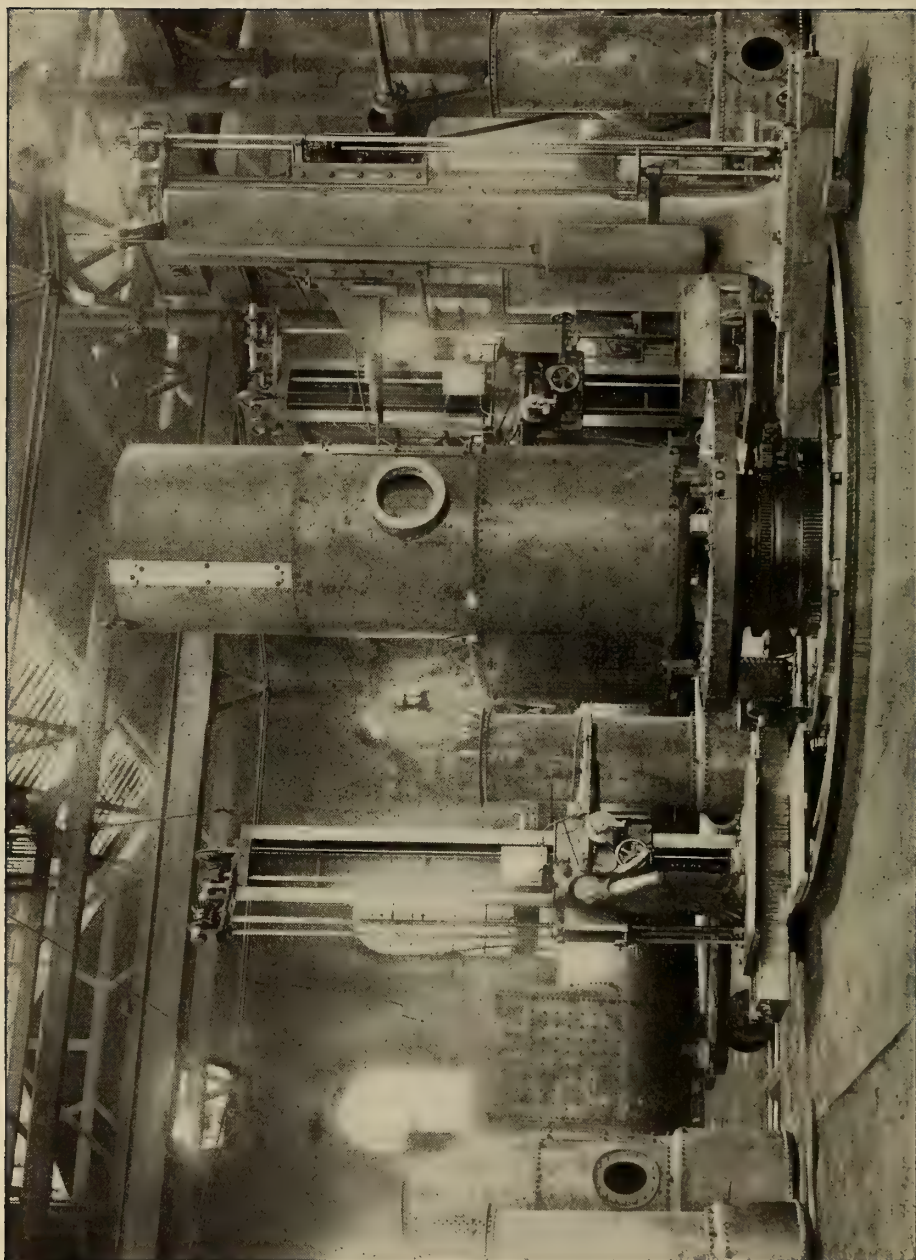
A BOILER SHELL DRILLING MACHINE.
